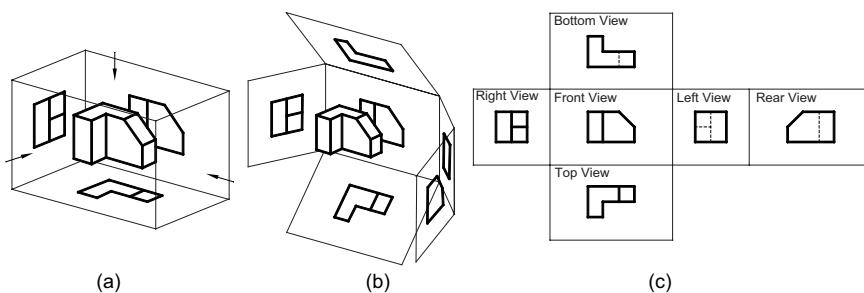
(a) Object kept in six-sided box (b) Unfold the box (c) Multi-view drawing in first angle
